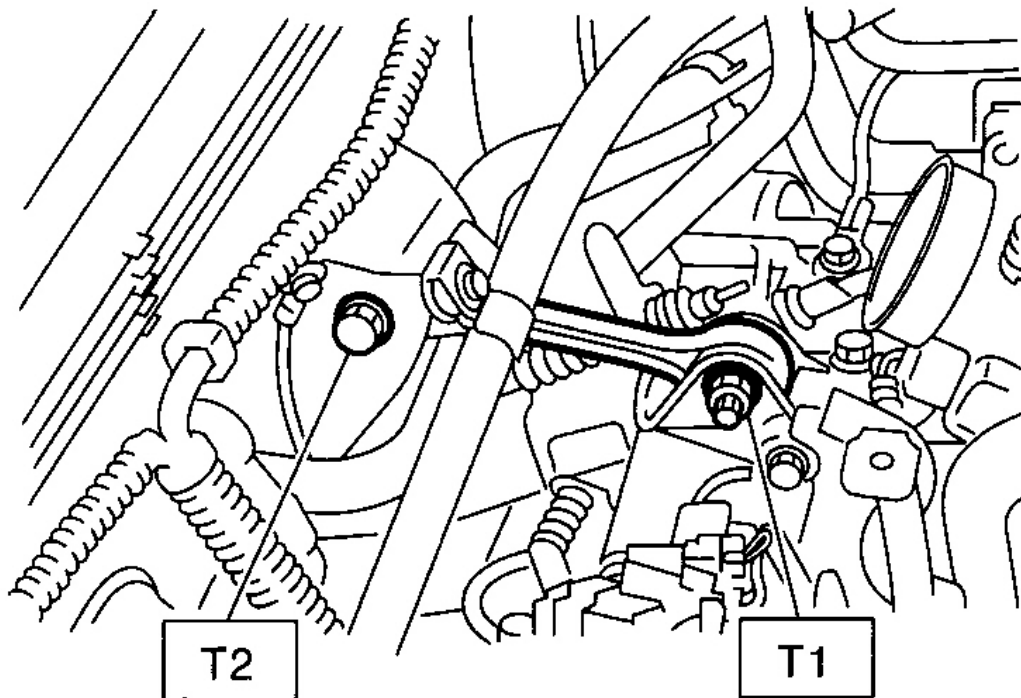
Tightening Bolts Which Hold Upper Side Of Transmission To Engine
